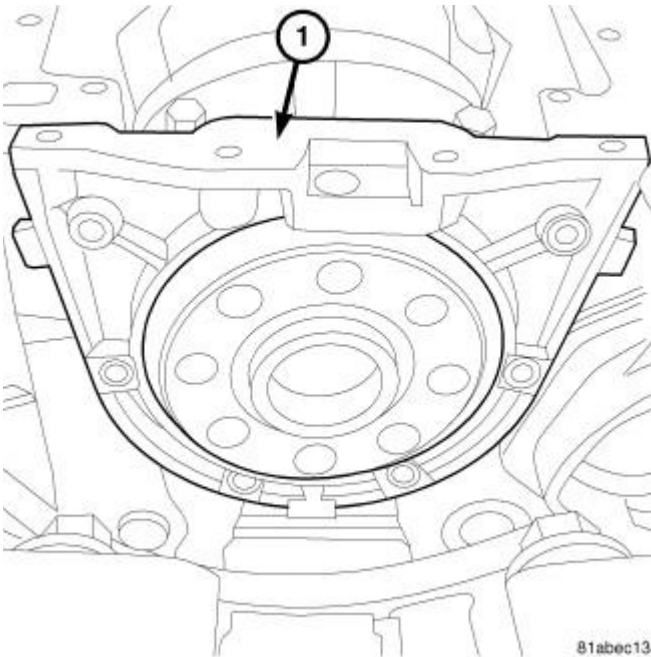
Rear Crankshaft Seal & Rear Main Oil Seal Carrier
